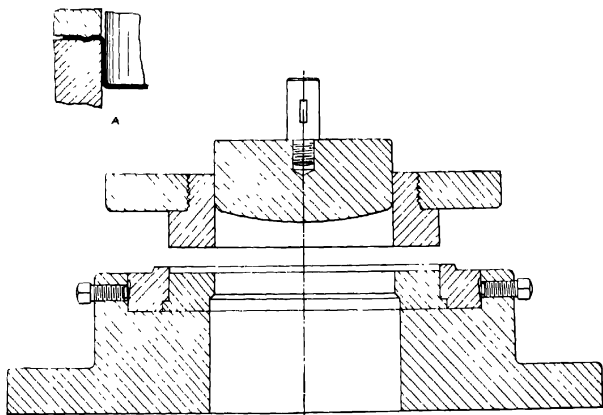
Combination die for blanking and drawing A, Beading, to increase the holding power of a blank-holder
